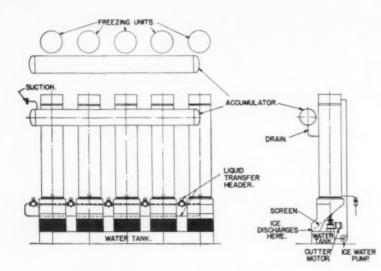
AUTOMATIC TUBE-ICE MACHINE, SHOWING SHELL-TO-SHELL EVACUATING SYSTEM
